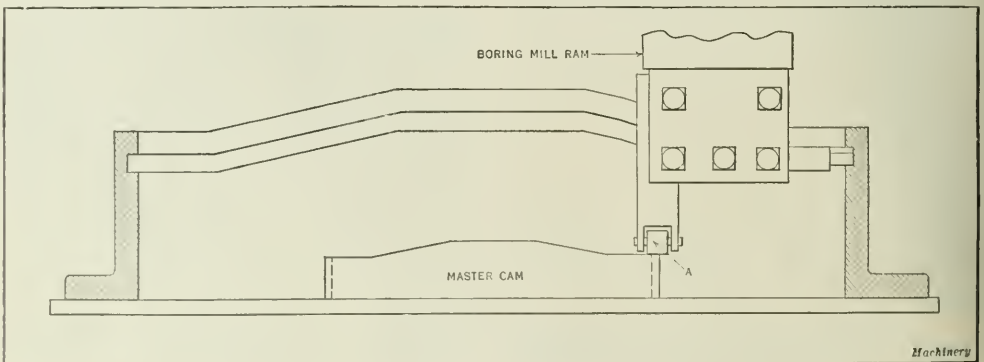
Boring Mill Set-up for cutting Groove in Cam shown in Fig. 2
